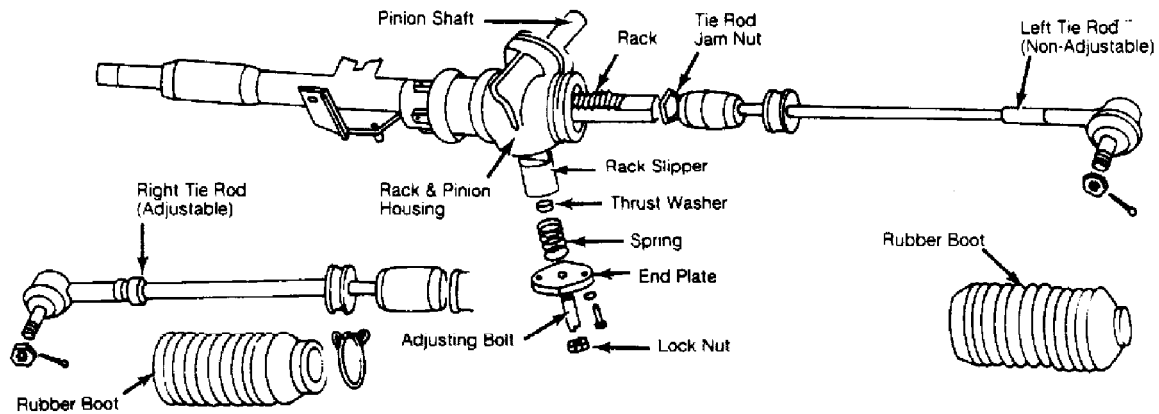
Exploded View of Rack & Pinion Steering Gear Assembly
